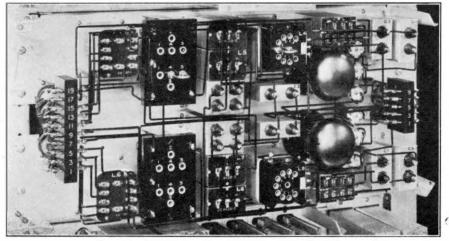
REPEATER PANEL SHOWING OPEN WIRING.
